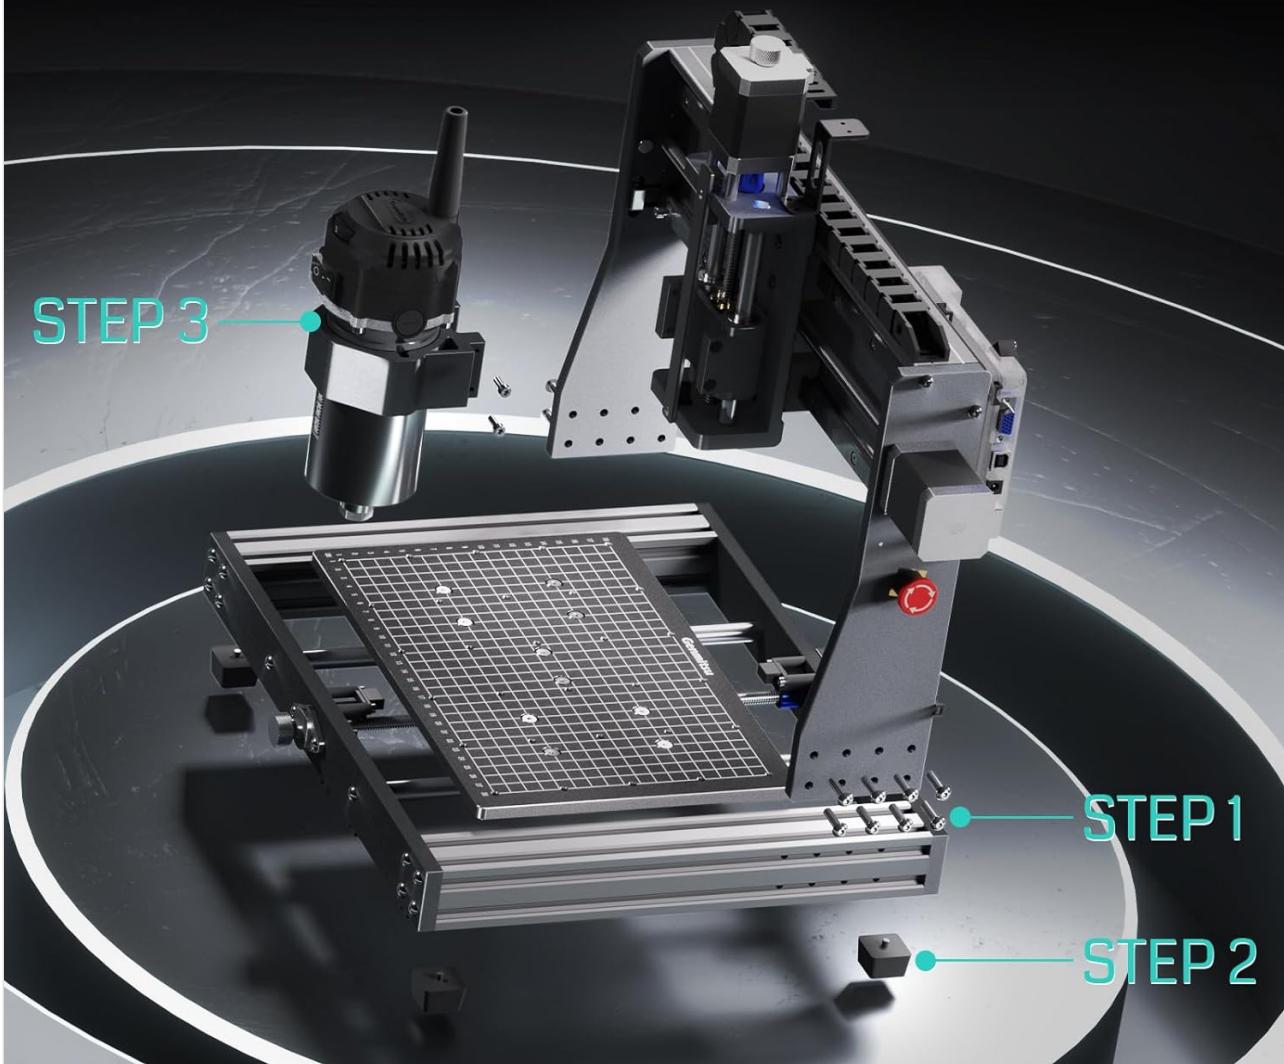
Simplified diagram showing the three main steps for assembly: Base, Gantry, and Spindle attachment, indicating a quick setup process.
